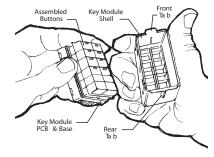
Assembly of Key Module Shell キーモジュールの組み立てかた
